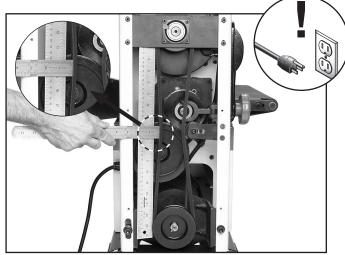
Checking V-belt tension with a straightedge and a ruler.
